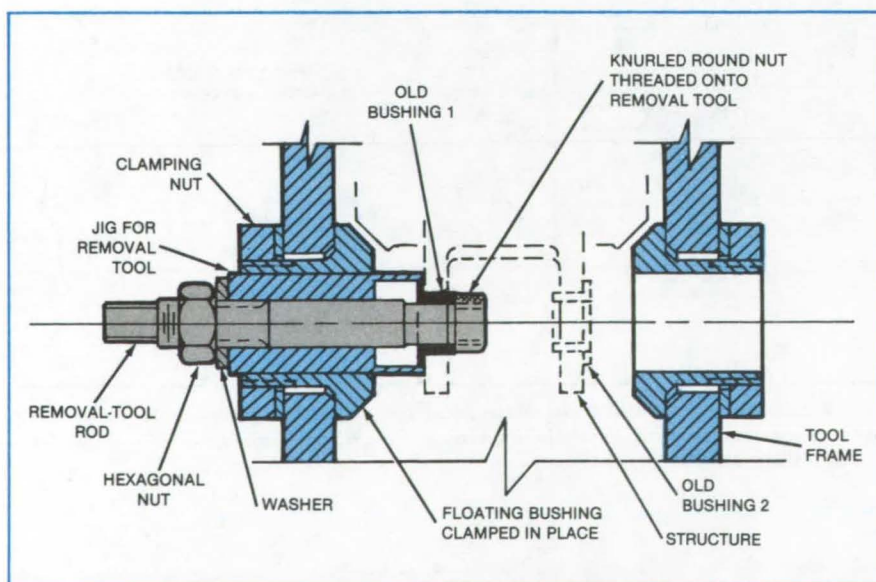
The Bushing-Removal Tool, shown in position for the removal of one of a pair of bushings, grips a bushing and pulls it free from the structure.
